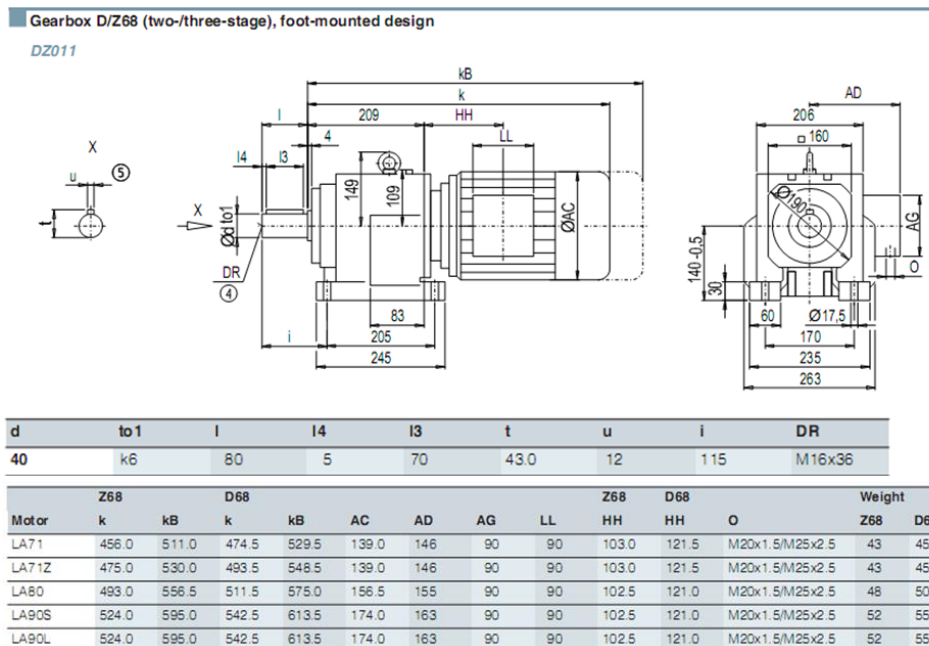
Design dimensions of the gear motor Z68-K4-LA/90L4
